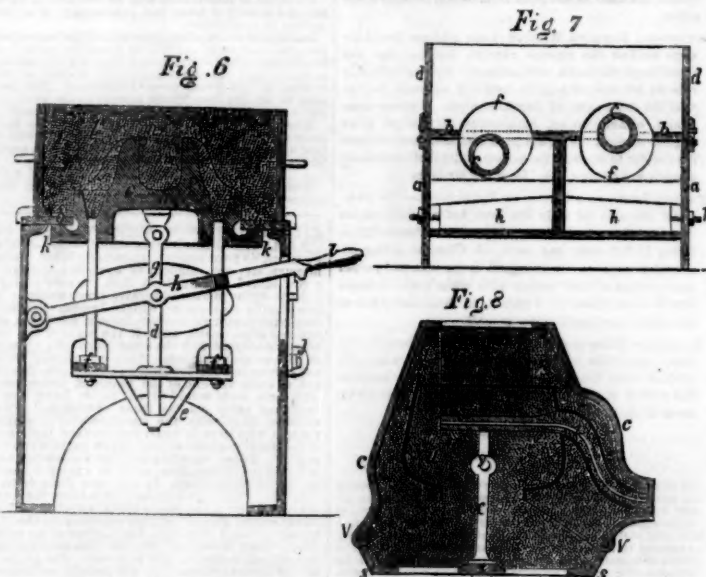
is a vertical section of a mold-making machine, of precisely the same construction as that represented in figs. 1 and 2, but represented as fitted with a pattern for a kettle. The spout of the kettle is molded by means of half pattern pieces, fitted by means of pegs, or otherwise, upon the plate, *d*. The pattern spout for one half mold is placed at the other side; so that when the two half molds are brought together upon the core, the
